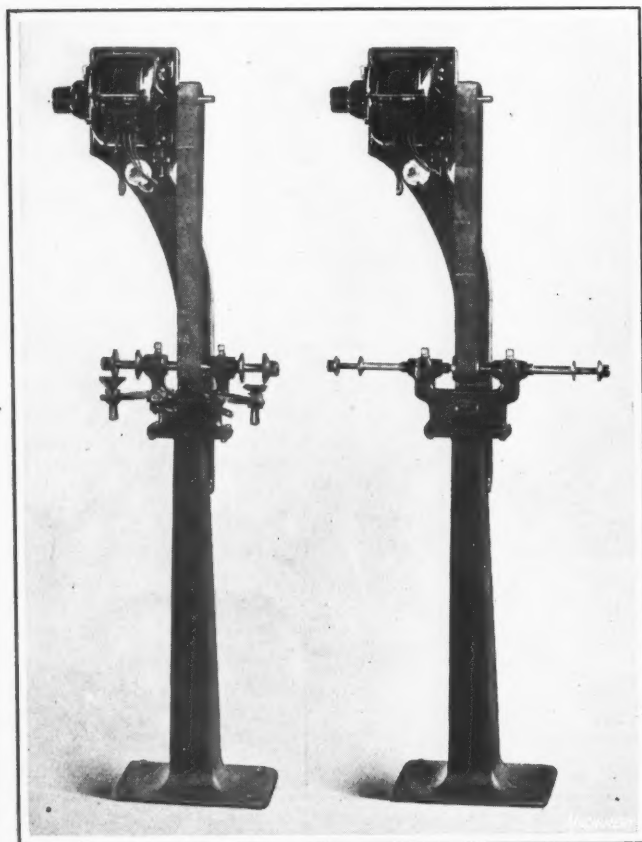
Grinding and Polishing Machines of a Line brought out by the St. Louis Machine Tool Co.
